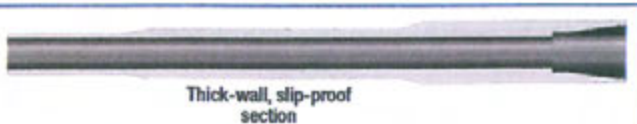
The heavy wall slip section provides a thicker wall in the slip-contact area, machined OD and ID surfaces and requires three welds.
